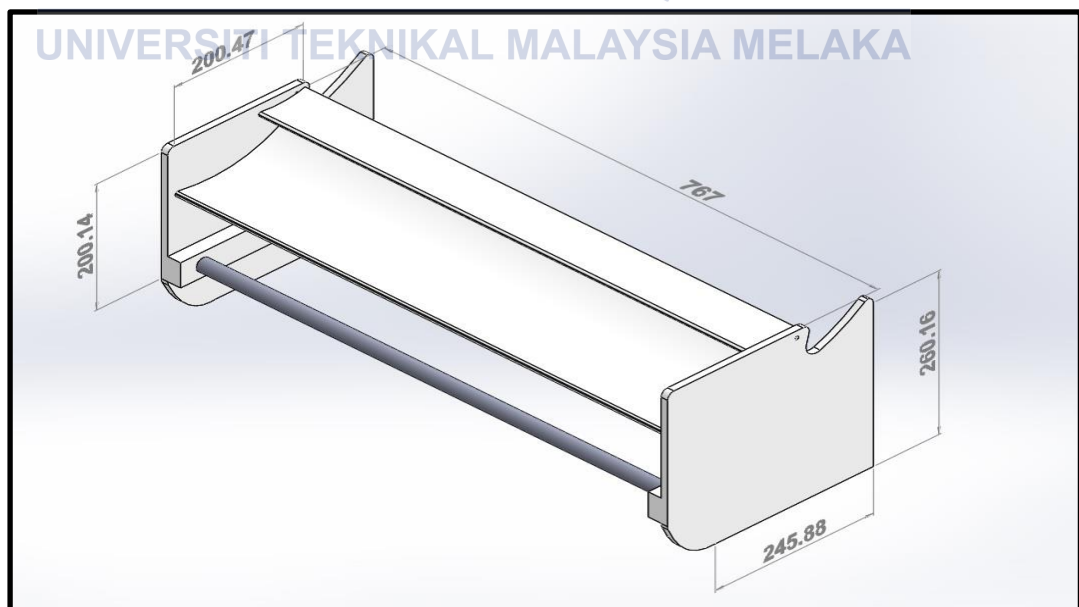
Rear Wing Dimension in millimetre (mm)
